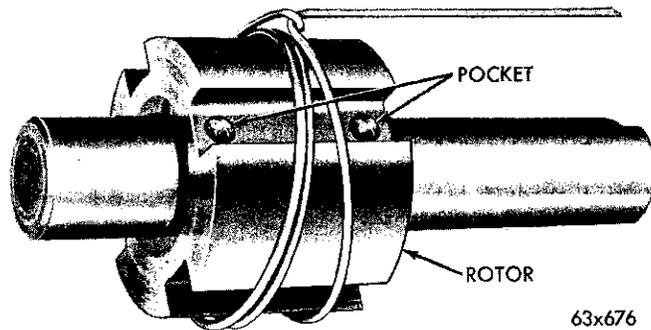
Slipper Retainer Wire Retainer Tool Installed on Rotor
